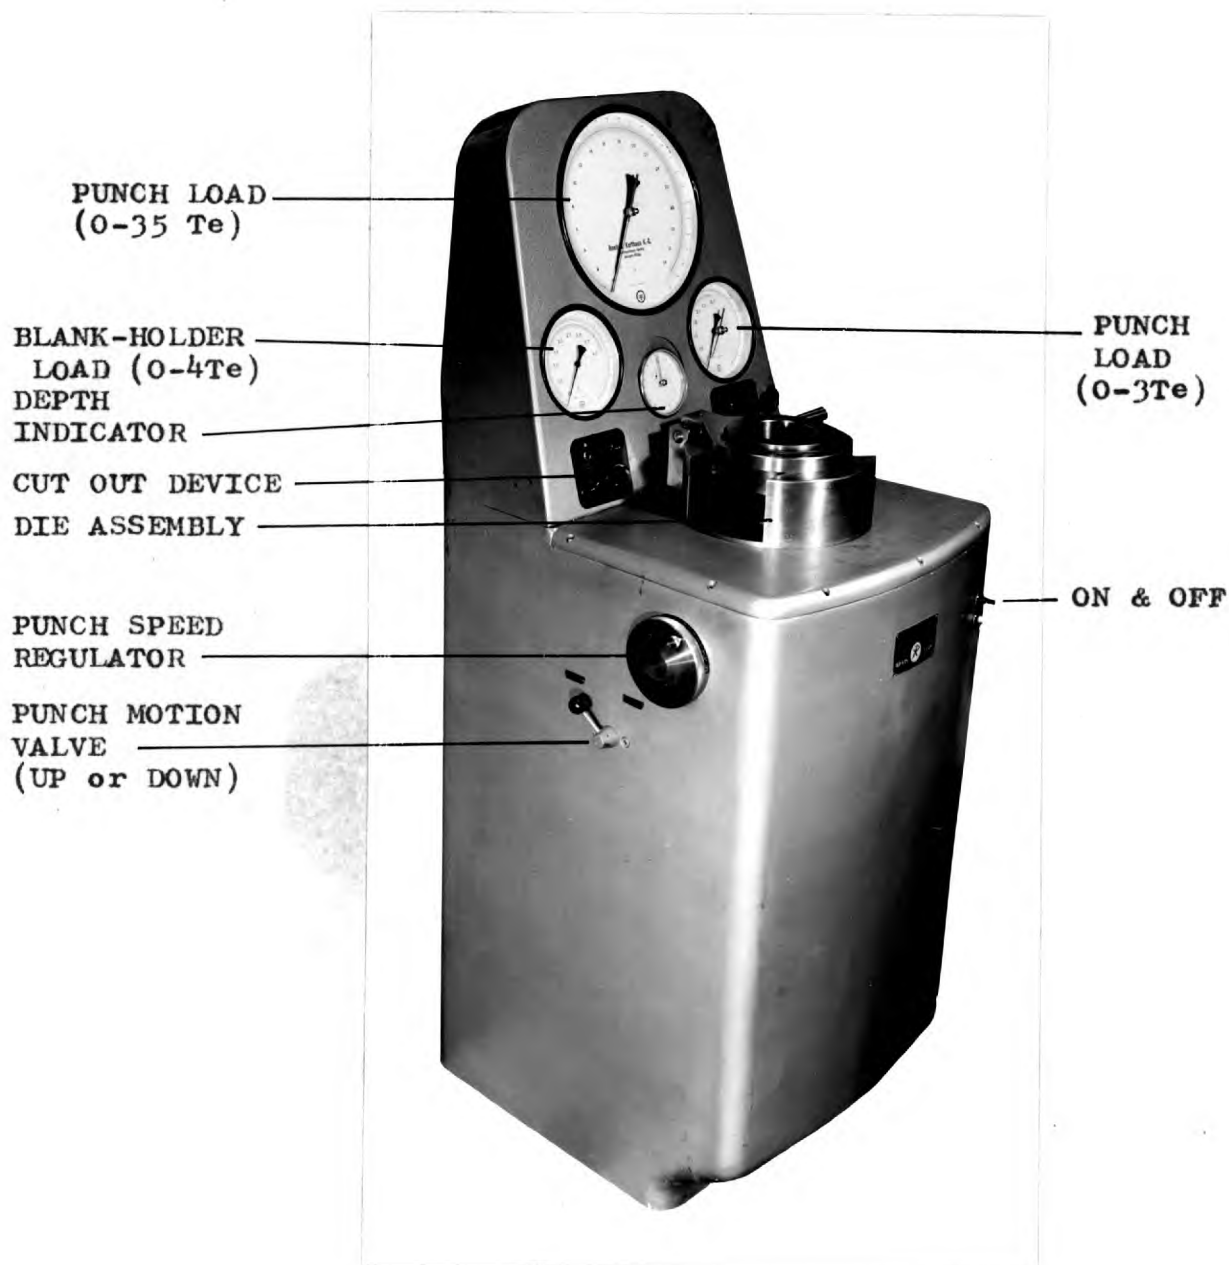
UNIVERSAL SHEET METAL TESTING MACHINE.
